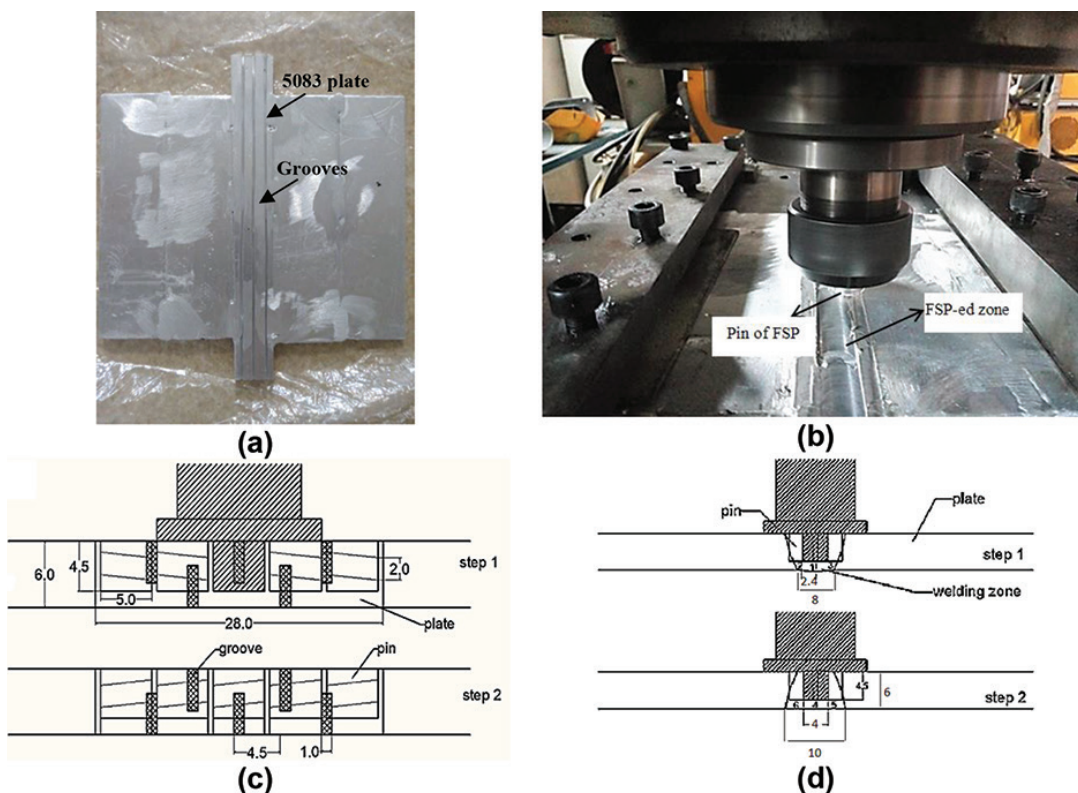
(a) Grooves utilized on 5083 aluminium to insert nanoparticles, (b) production of the composite filler using friction stir processing, (c) schematic of tool traverse along the strip, and (d) schematic view of the tool position relative to the TIG welded plate
